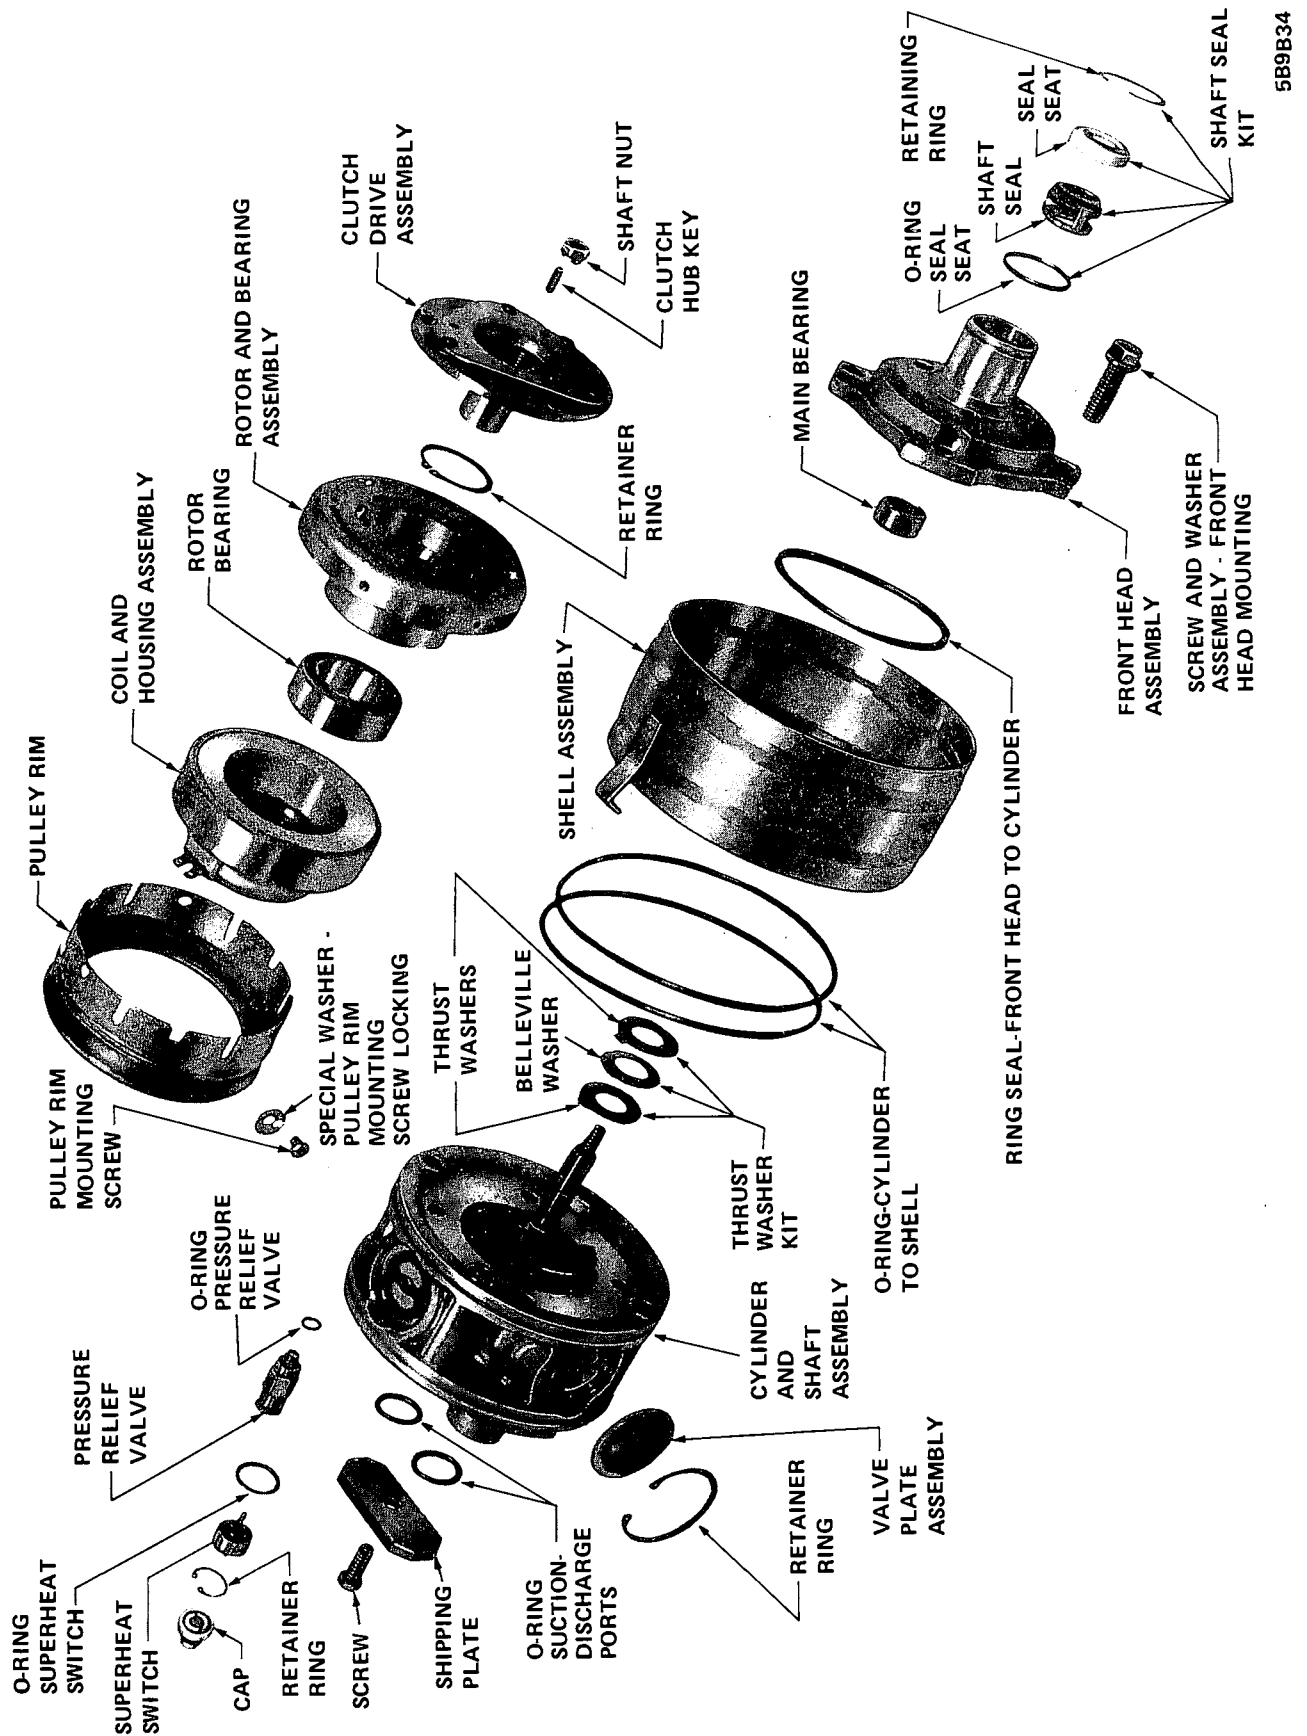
B-117 - Radial 4-Cylinder Compressor-Exploded View
